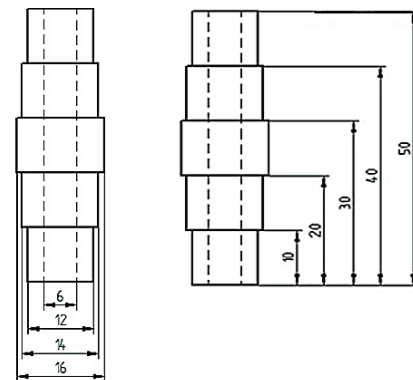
The designed dimensions of the stainless steel hollow step cylinder. The complete calibration workpiece (shown in Fig. 9(a)) includes this step cylinder and the previously used stainless steel pin.
